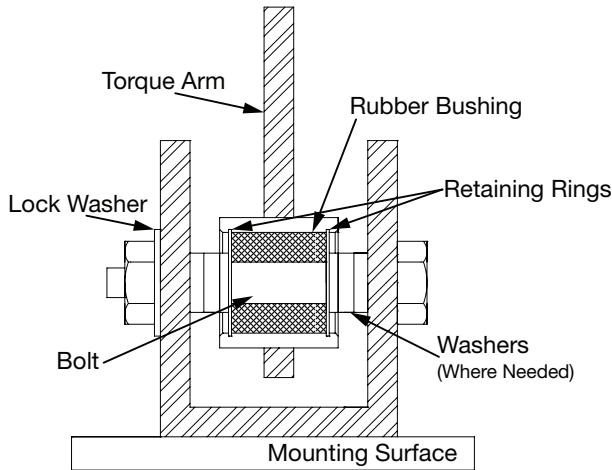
Quantis Torque Arm Mounted to Customer Bracket
